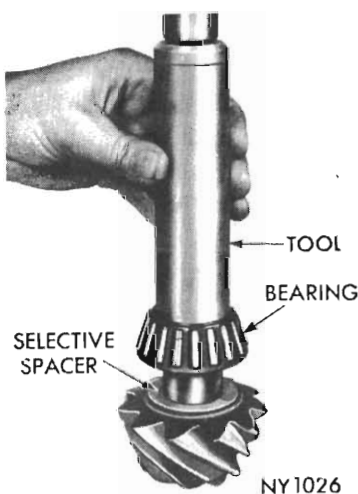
Installing pinion spacer and rear bearing using tool E3C10G.
